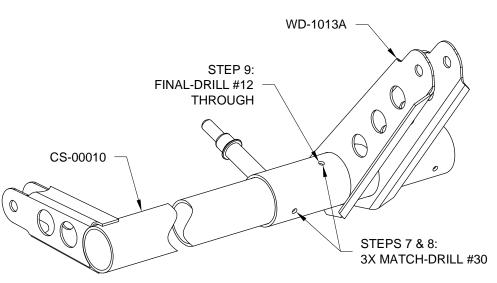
DRILLING FLAP CRANK AND TORQUE ARM (LEFT SHOWN)
